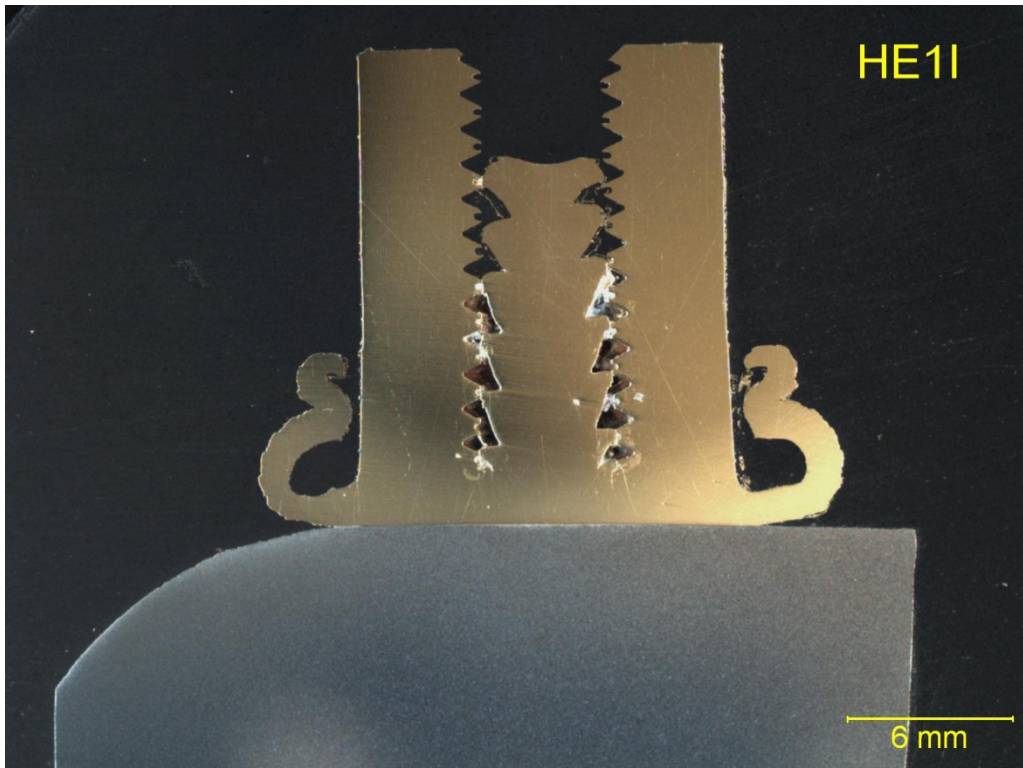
IFW Weld Joint Hyper-Eutectoid Rail #A
